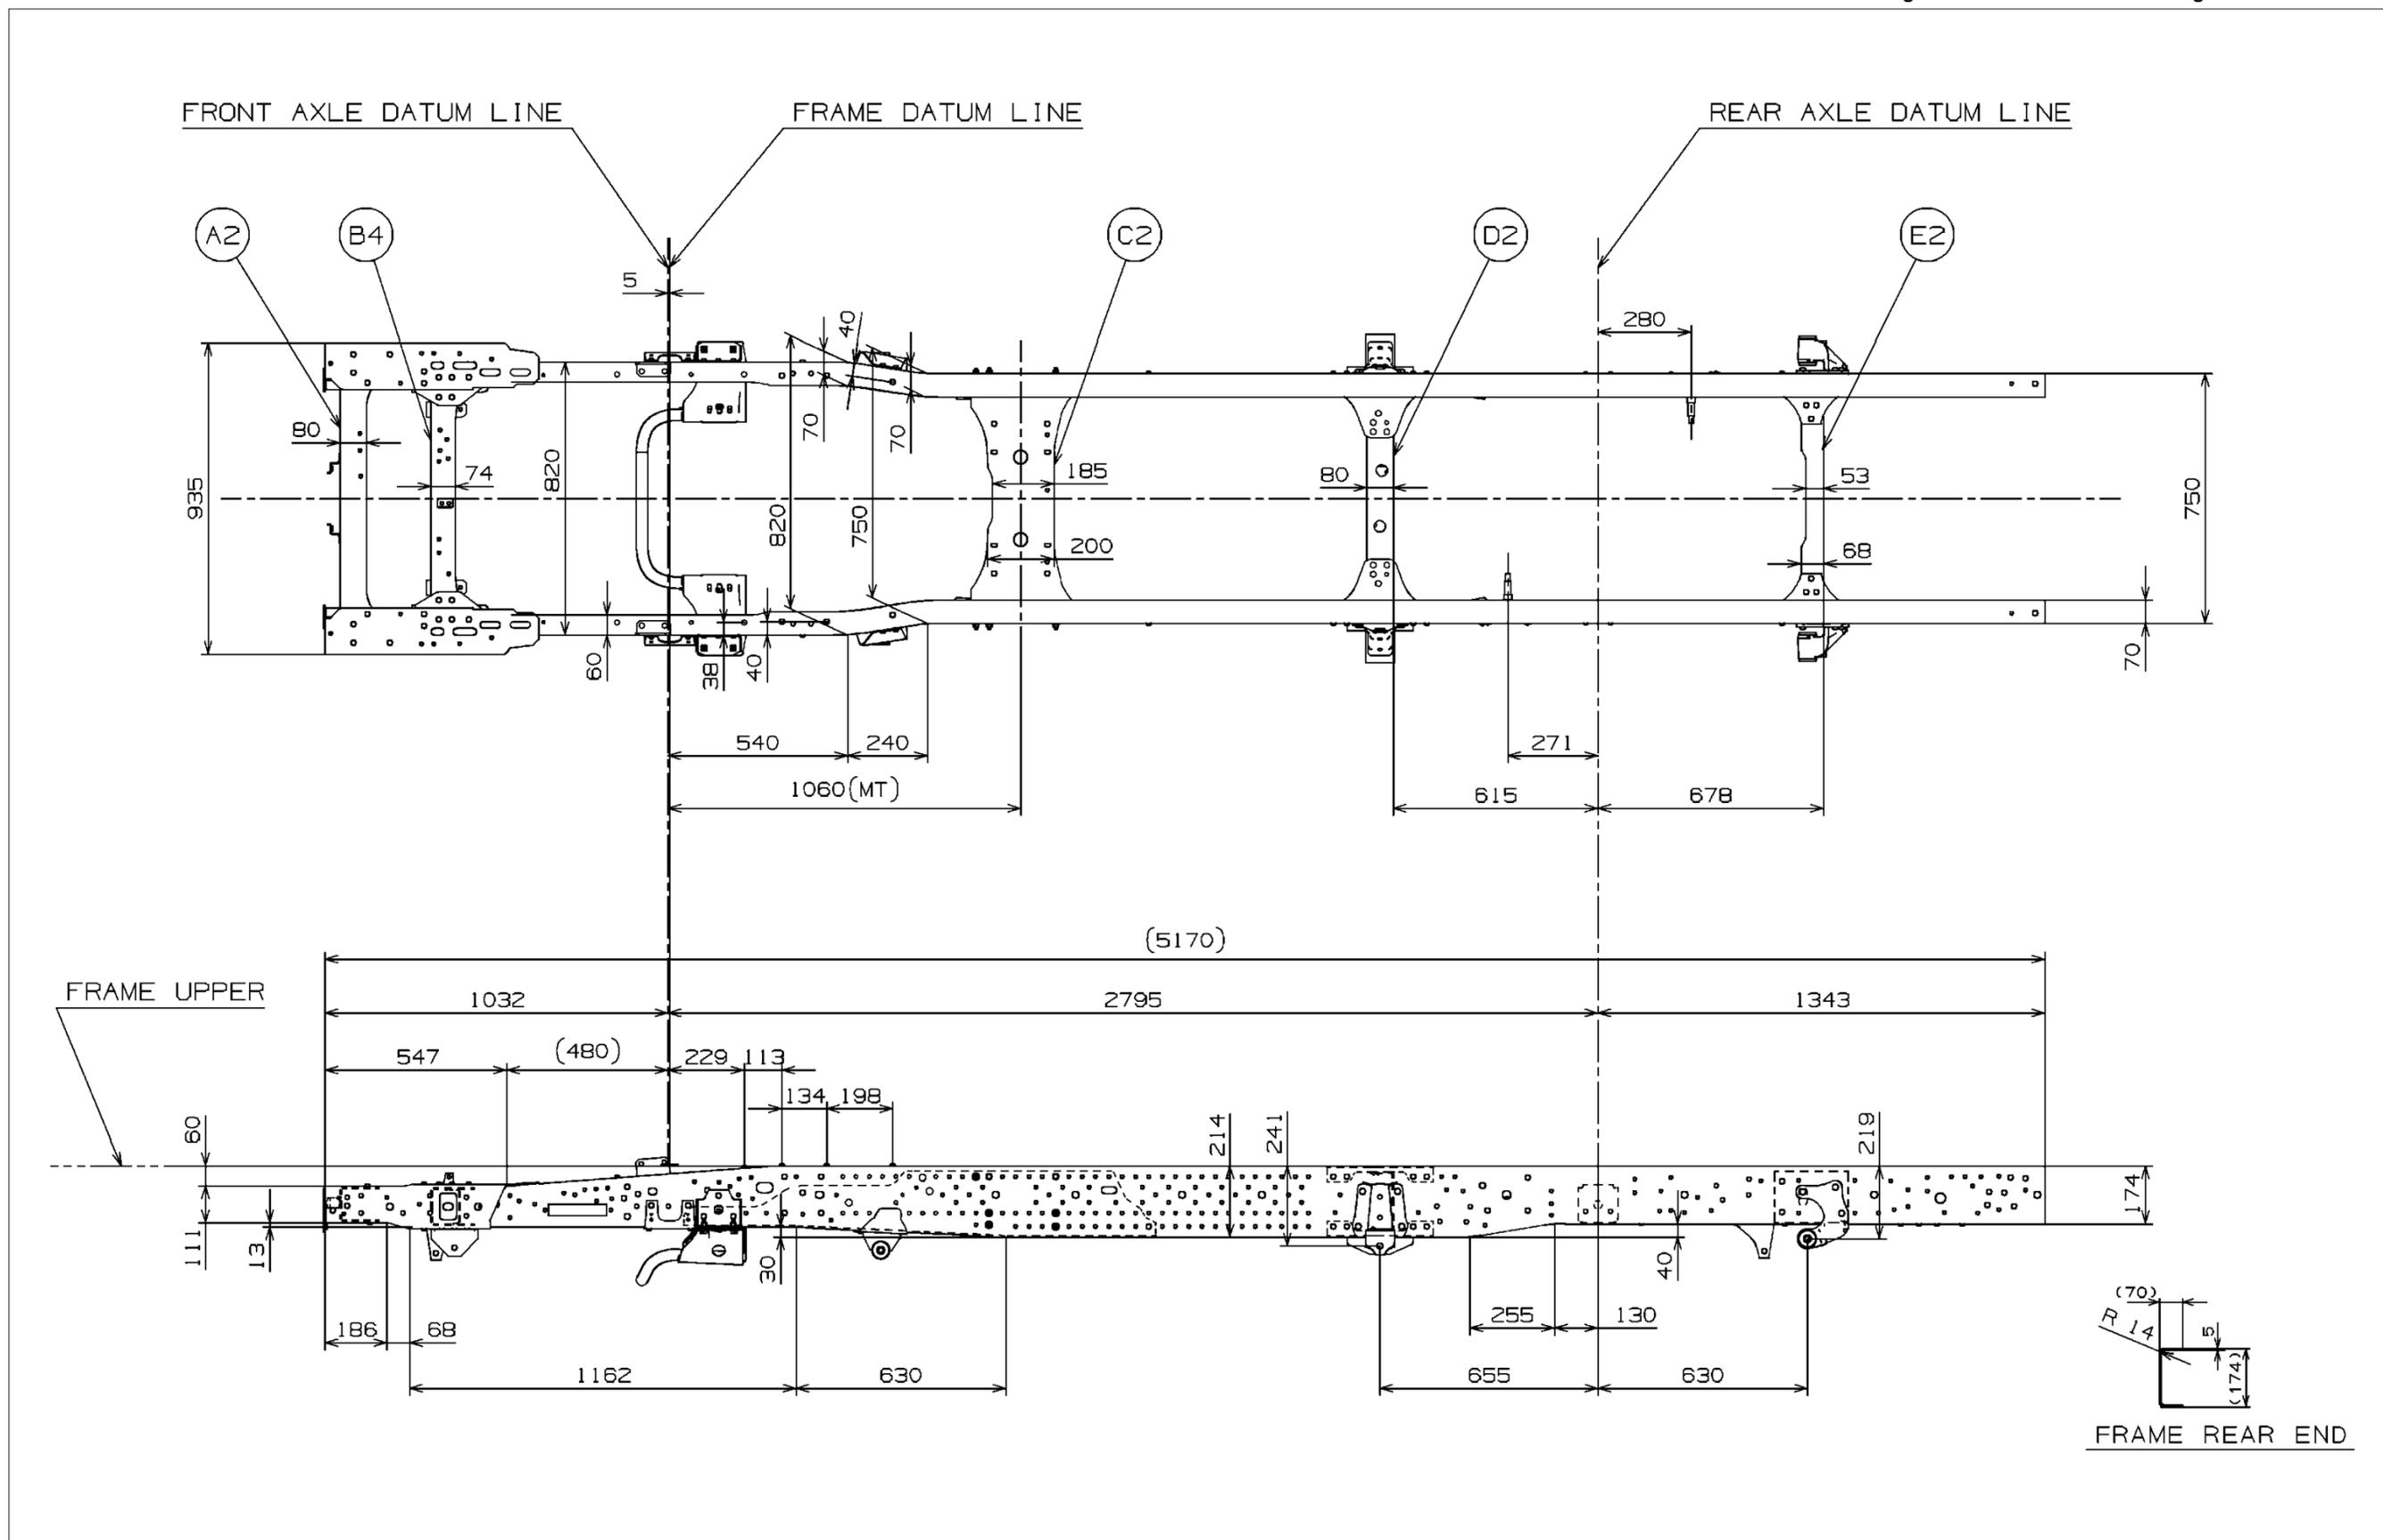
Chassis Frame Drawing NNR85L/U-HD5AYEN
